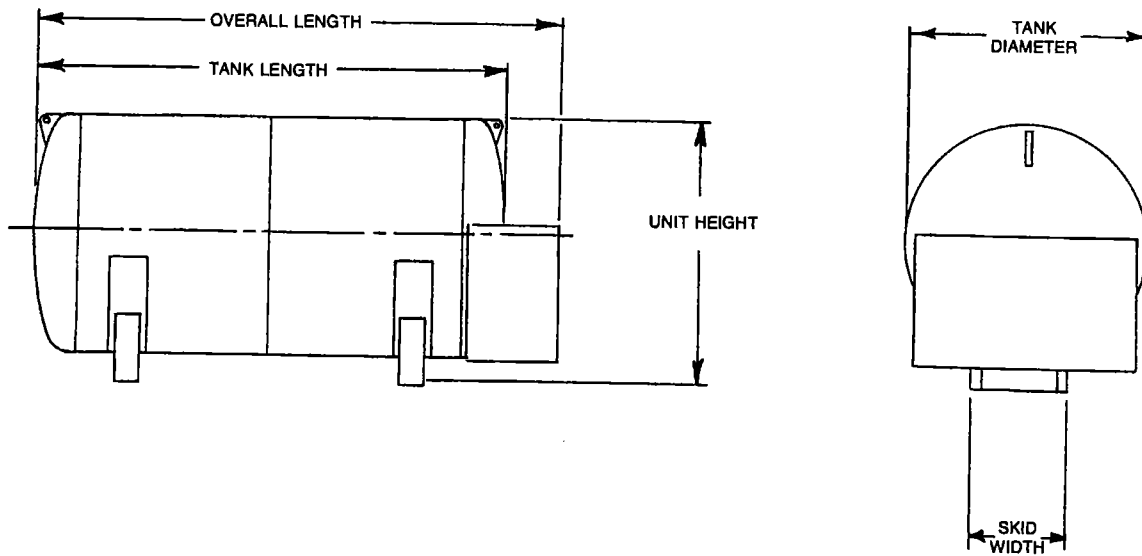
Outline Drawing Chassis Mounting Liquid Delivery Units
